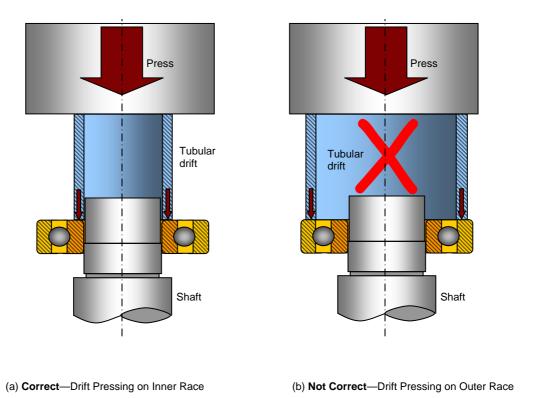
Bearing with Inner Race an Interference Fit on the Shaft
